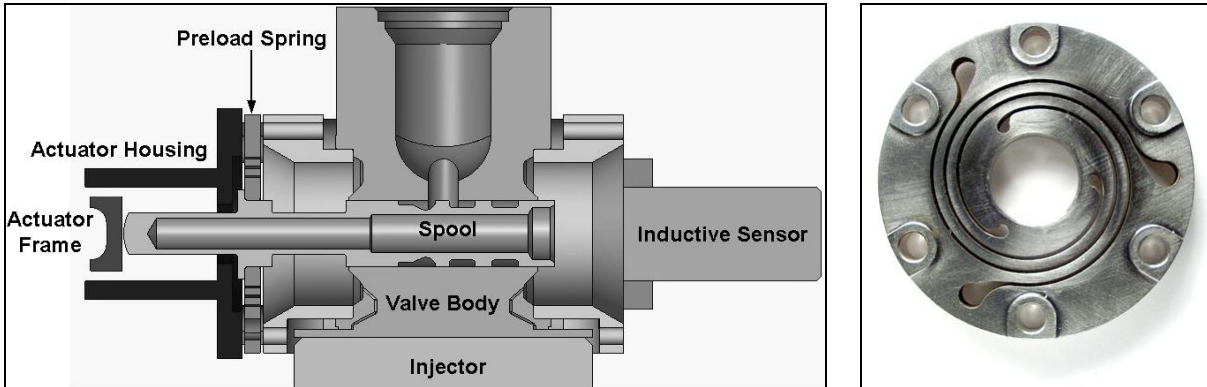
Cross-sectional view of the control valve, spool, spring, sensor, and actuator assembly (left). Front view photo of the low profile, 55 N/mm return spring (right).
